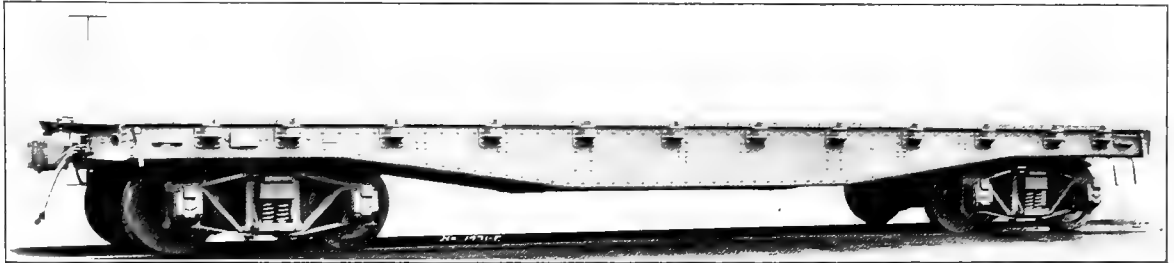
Steel Frame 50-Ton Capacity Flat Car. Weight, 39,500 lbs.; Length of Platform, 40 ft.; Height, Rail to Top of Platform, 4 ft. Builder, Pressed Steel Car Co.
